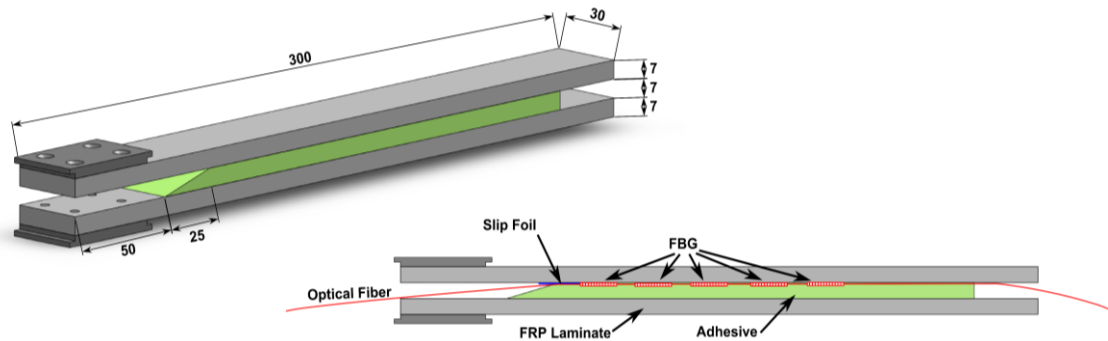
DCB specimen geometry and FBG sensor array configuration.
